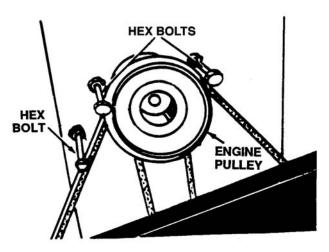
Location of Hex Bolts (Belt Keepers)
